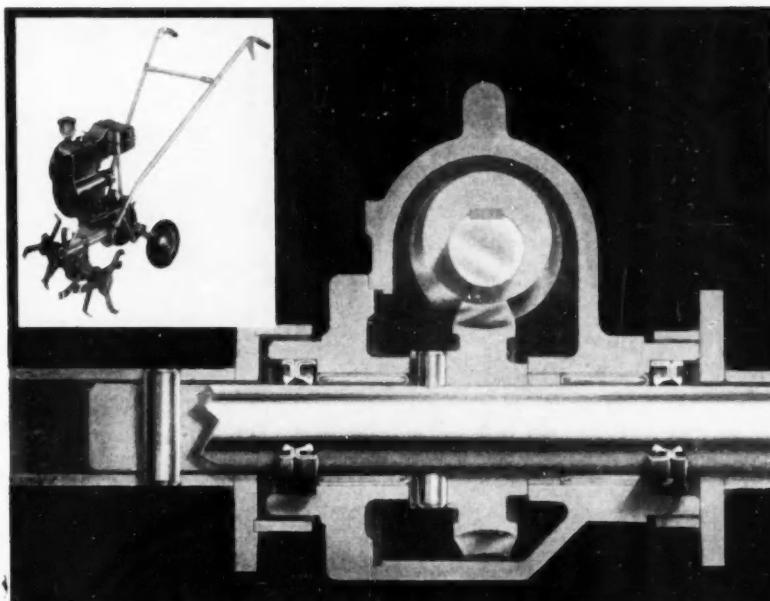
Gear housing assembly, Choremaster Garden Tiller
